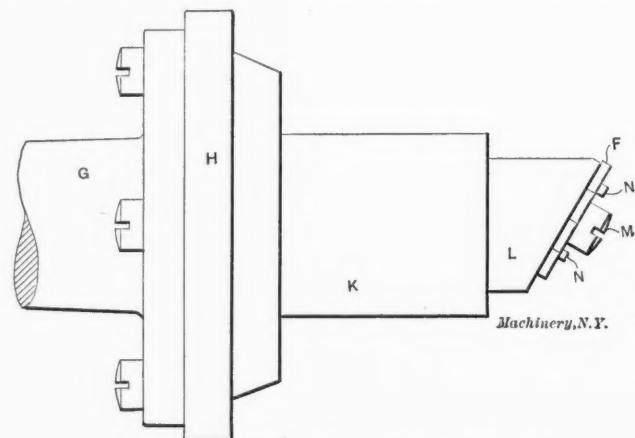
Chuck for Mounting the Pieces shown in Fig. 2.
